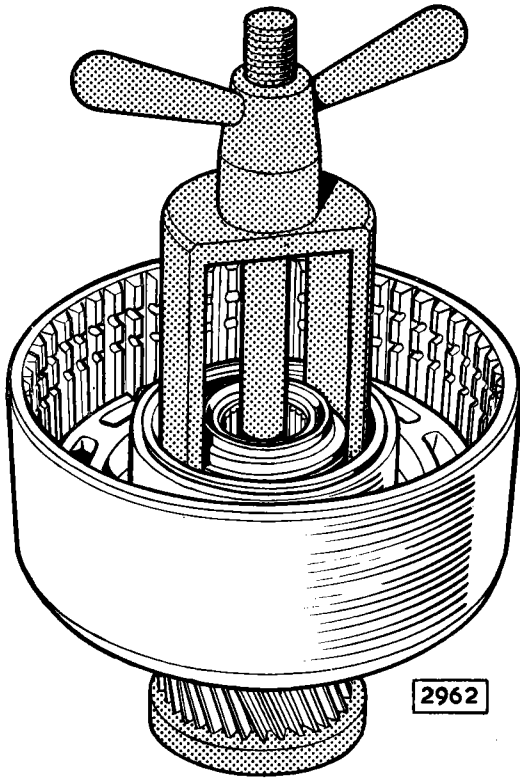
Dismantling the clutch using the special tool (Part No. CBW37A)
